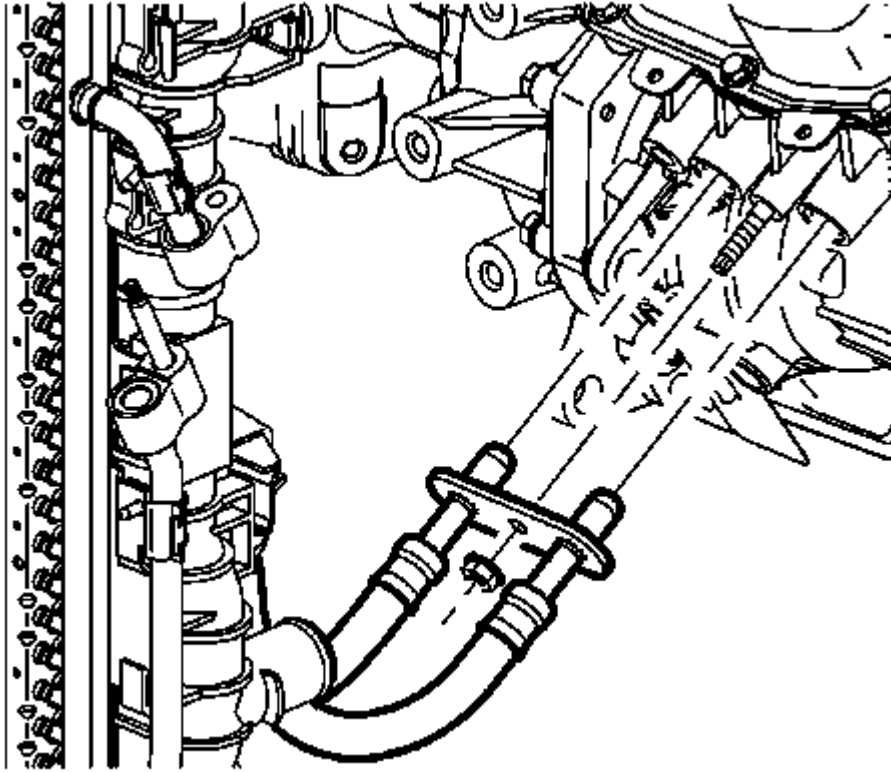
View Of Transaxle Oil Cooler Line Assembly
